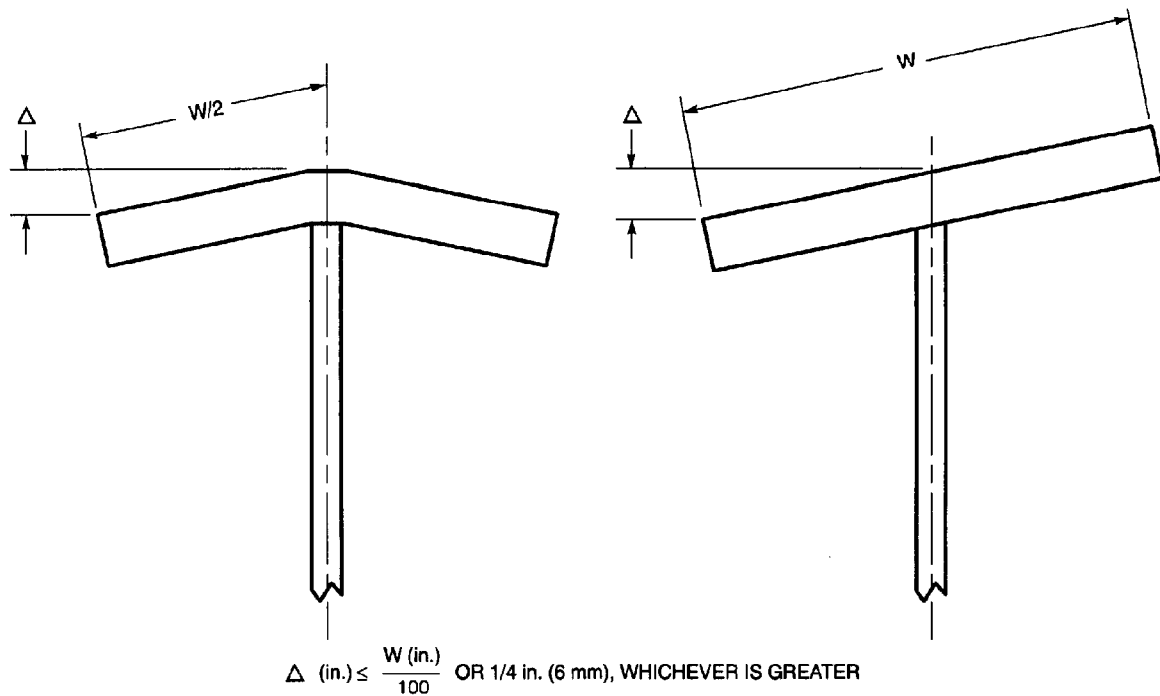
Measurement of Flange Warpage and Tilt (see C5.23.8)
